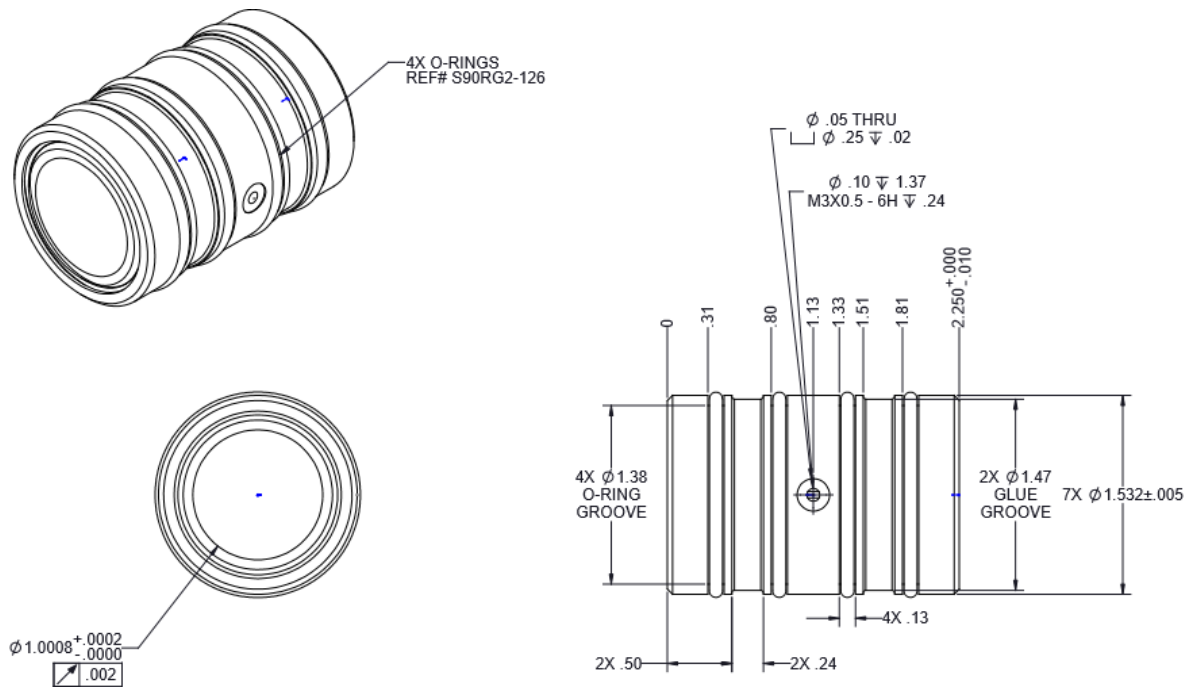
Technical drawing of the air bushing. Dimensions in inches. Source company: New Way Air Bearings.
